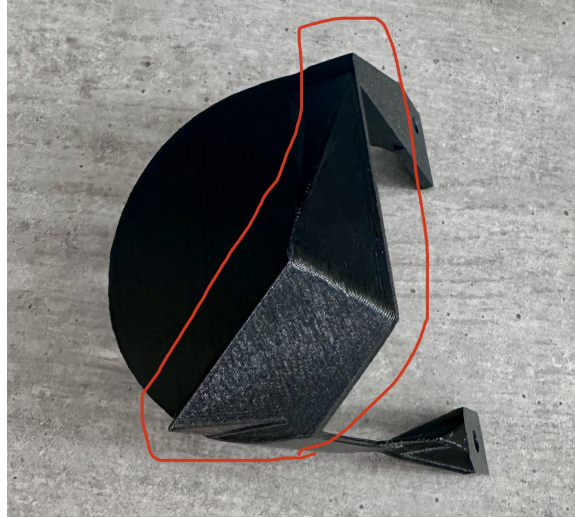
3D printed HSE wheel cover showcasing a guiding edge.
